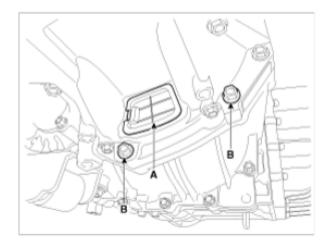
Identifying Dust Cover And Transaxle Mounting Bolts Courtesy of HYUNDAI MOTOR AMERICA
